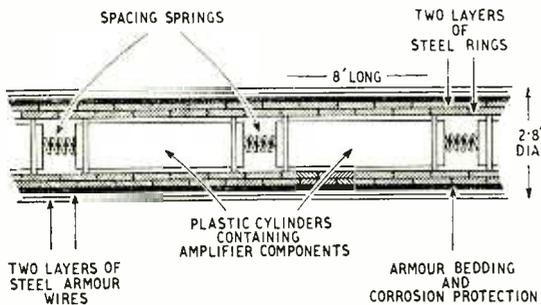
Longitudinal section showing construction of American-type flexible repeater built into the main transatlantic run of the cable.
